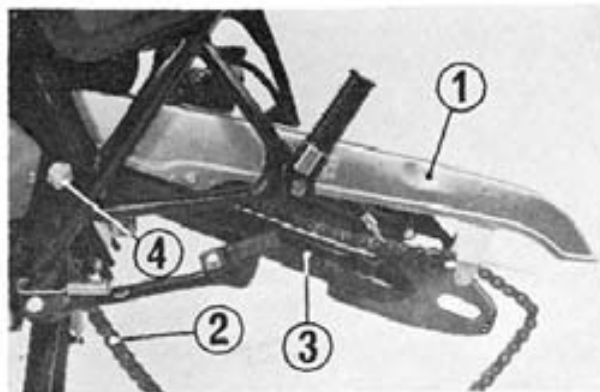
① Drive chain case ② Drive chain ③ Self-locking nut ④ Rear fork pivot bolt
